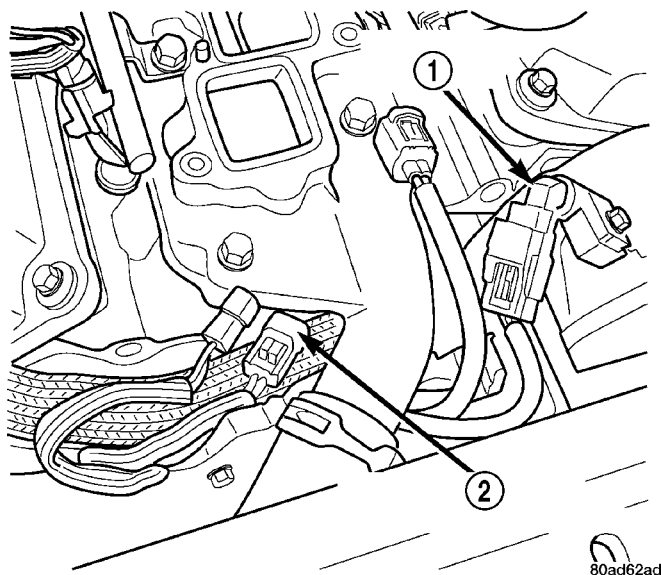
ENGINE COOLANT TEMPERATURE SENSOR - 3.5L
